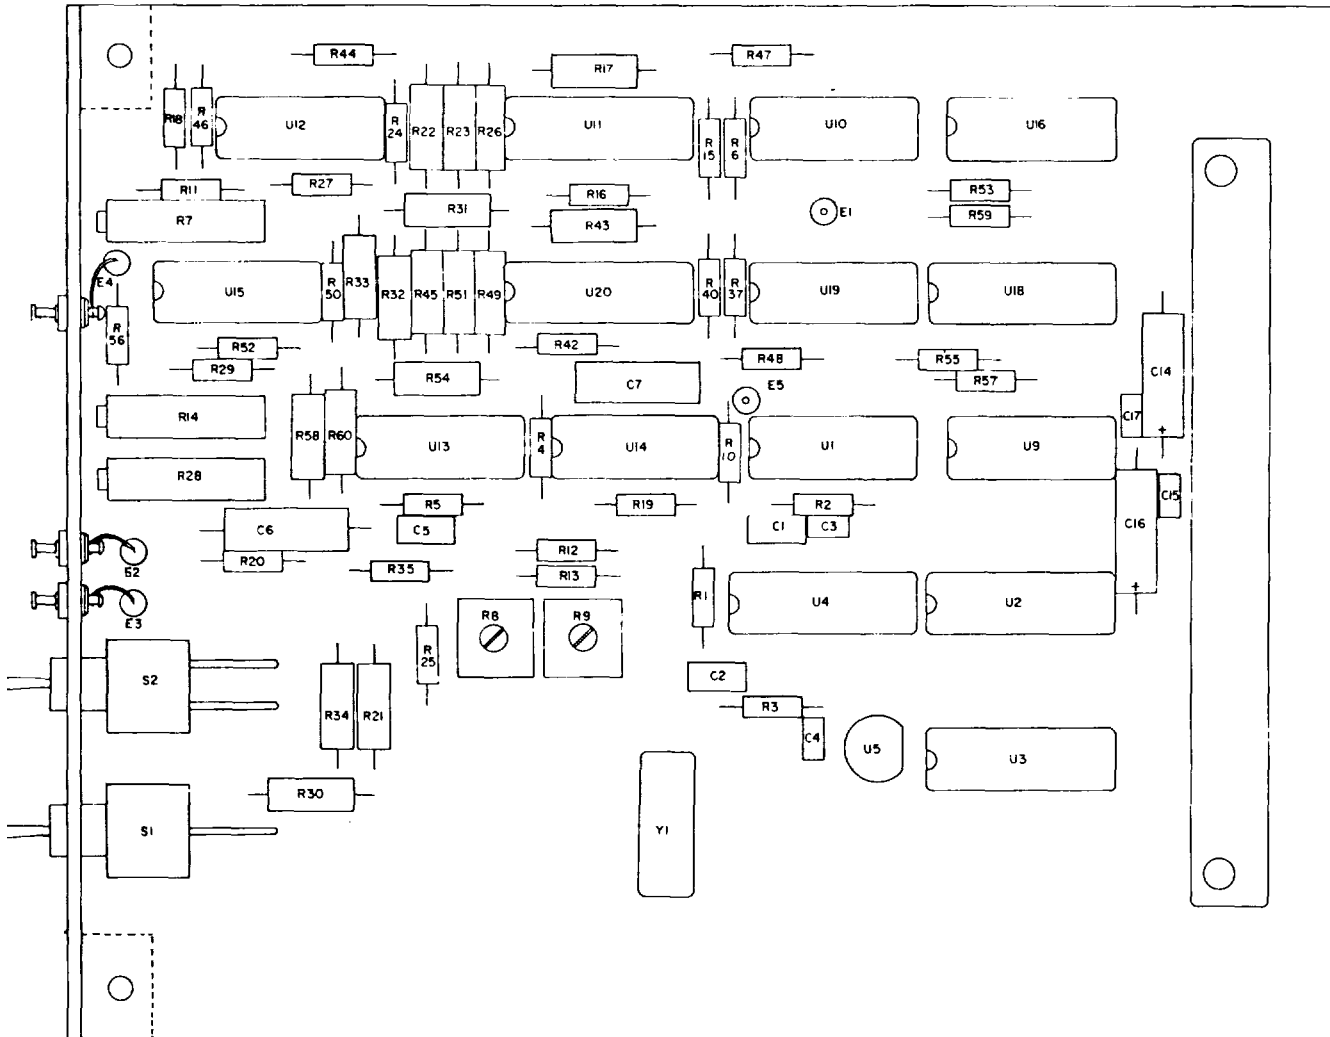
Test Generator Circuit Card Assembly, 1A3A5 Parts Location Diagram
